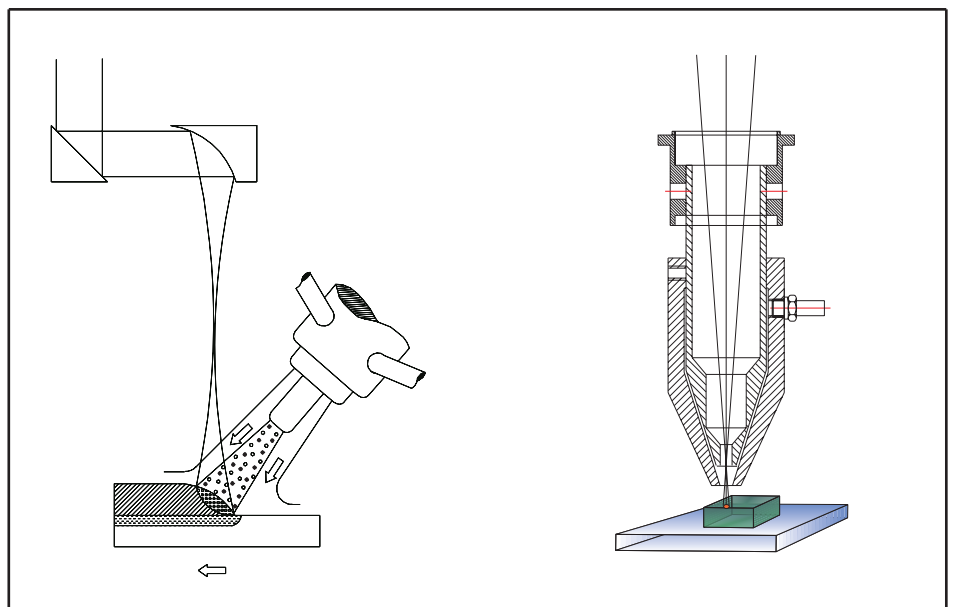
Versions of laser beam powder build-up welding
